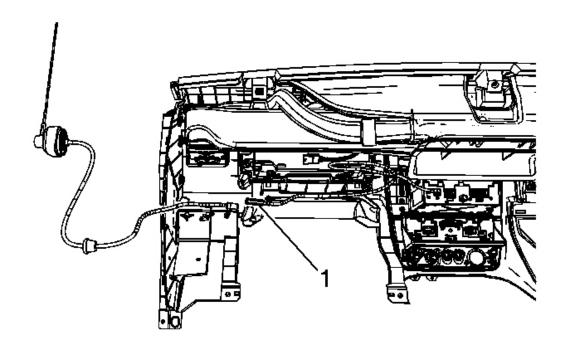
Identifying radio extension antenna cable Courtesy of GENERAL MOTORS CORP.
